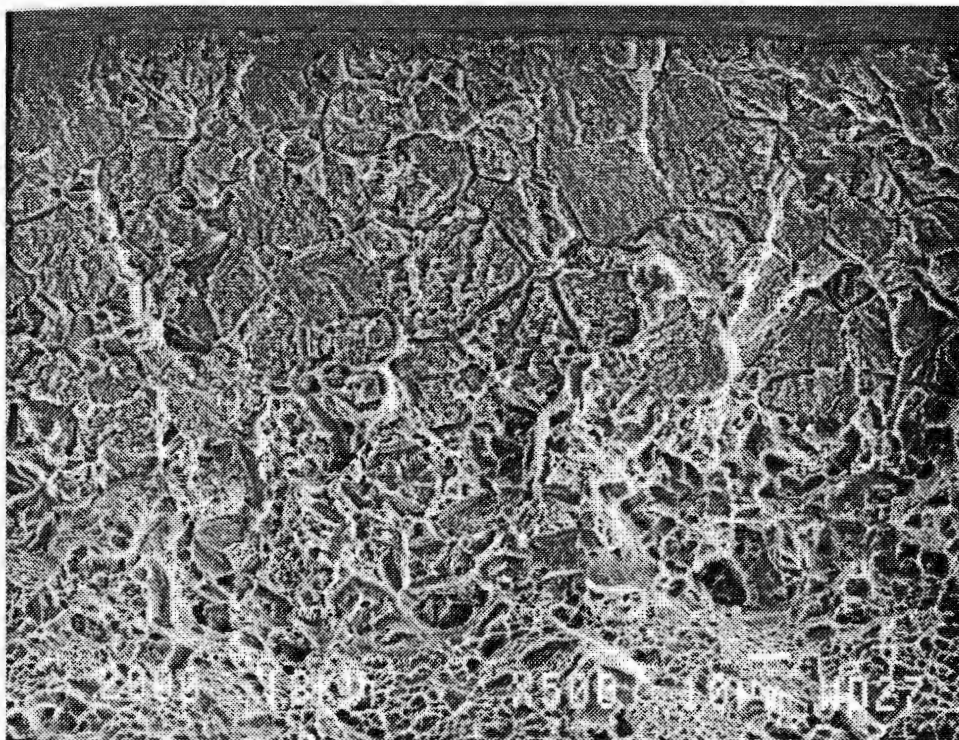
The fracture surface of 1.0 mm, tensile, and exposed specimen of Timetal – 21S with exposure parameters 693 °C, and 80 hrs
